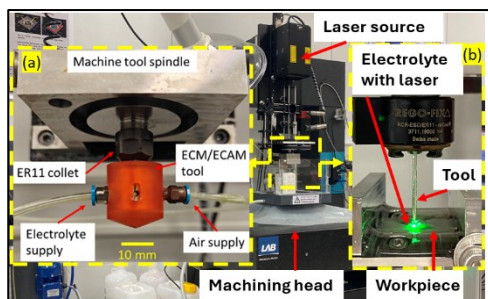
Multifunctional machine tool with (a) hybrid EC-tool for ECM/ECAM and (b) tubular tool for ECM/LECM.
